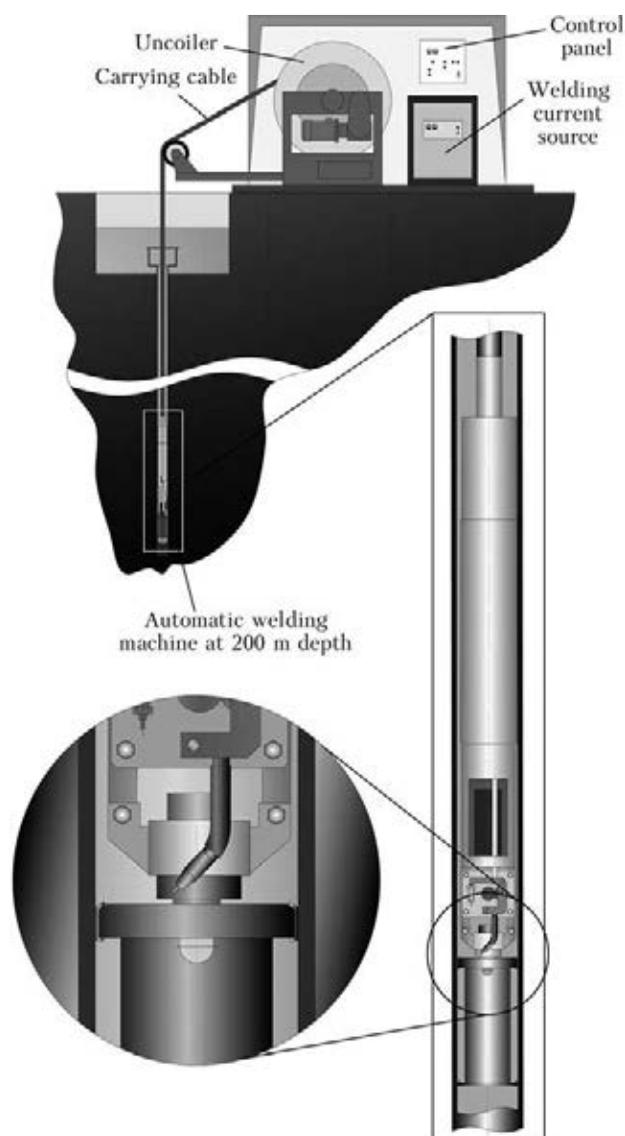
Complex of equipment for automatic welding inside the pipe at great depth
